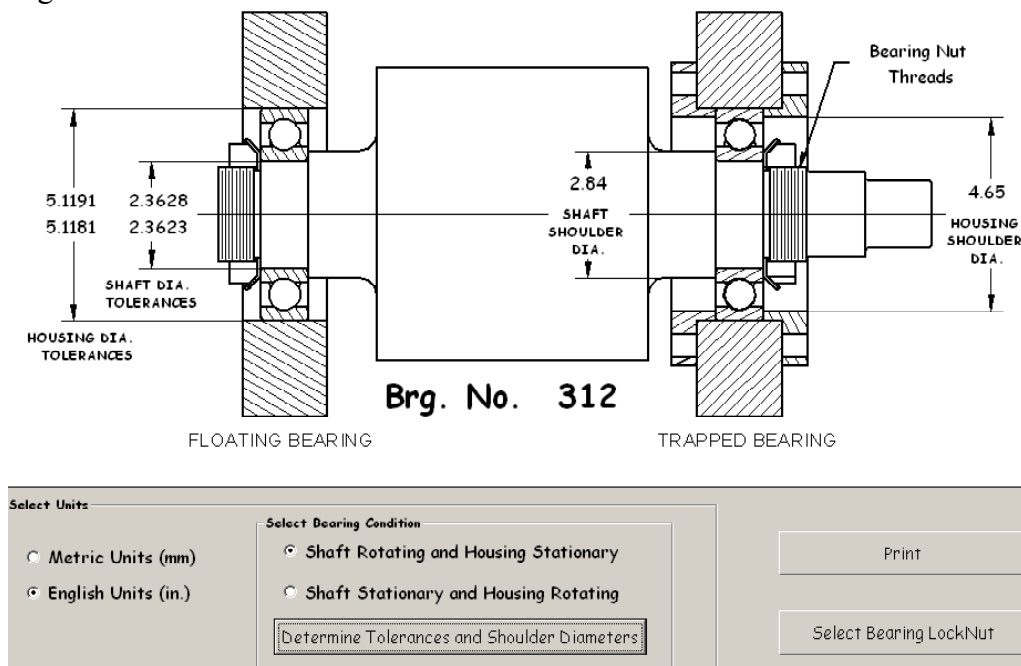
Housing and Shaft Dimensions for Bearing Selection
